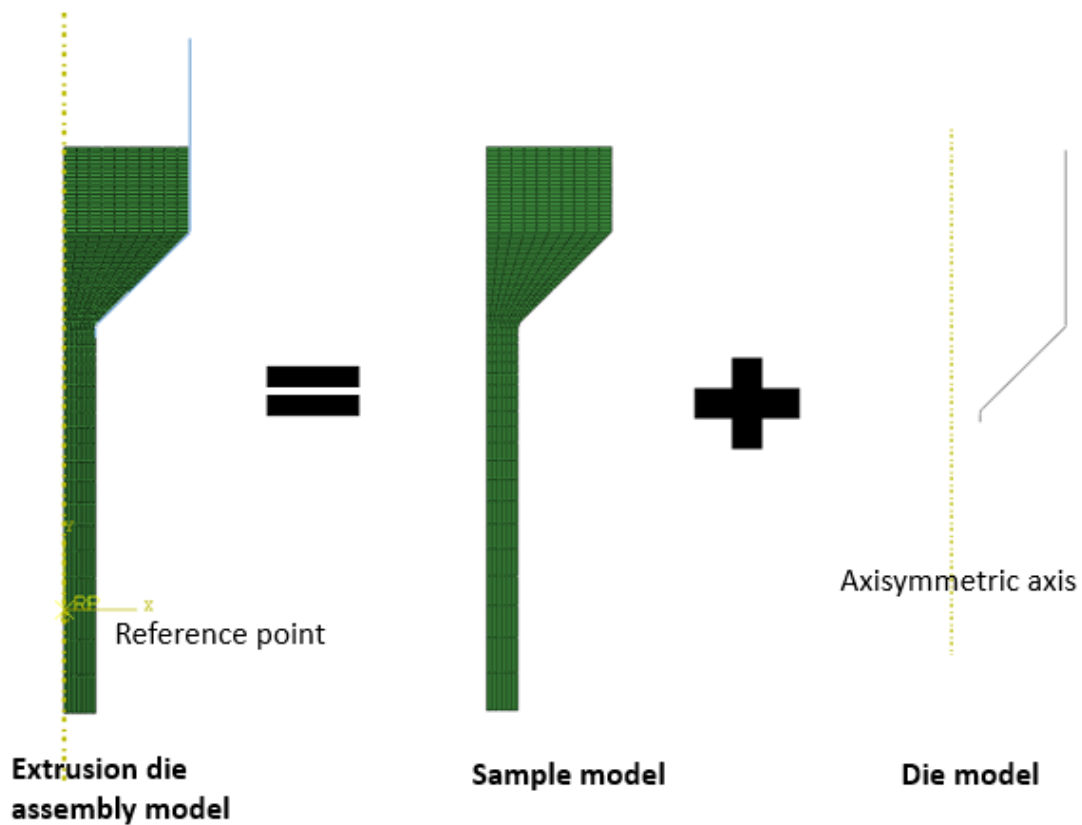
Extrusion die assembly model (it is composed of sample and extrusion die).
